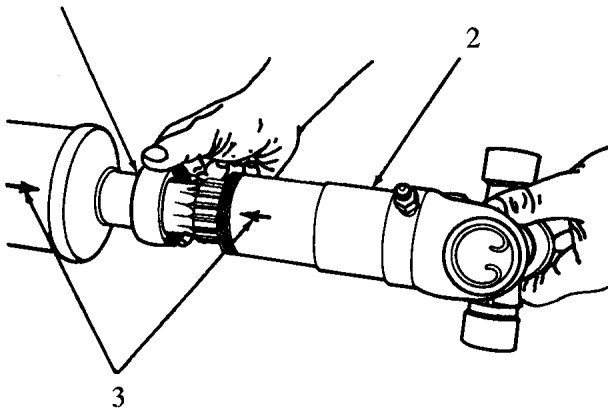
Lubrication Point On Steering Upper Slip Joint
